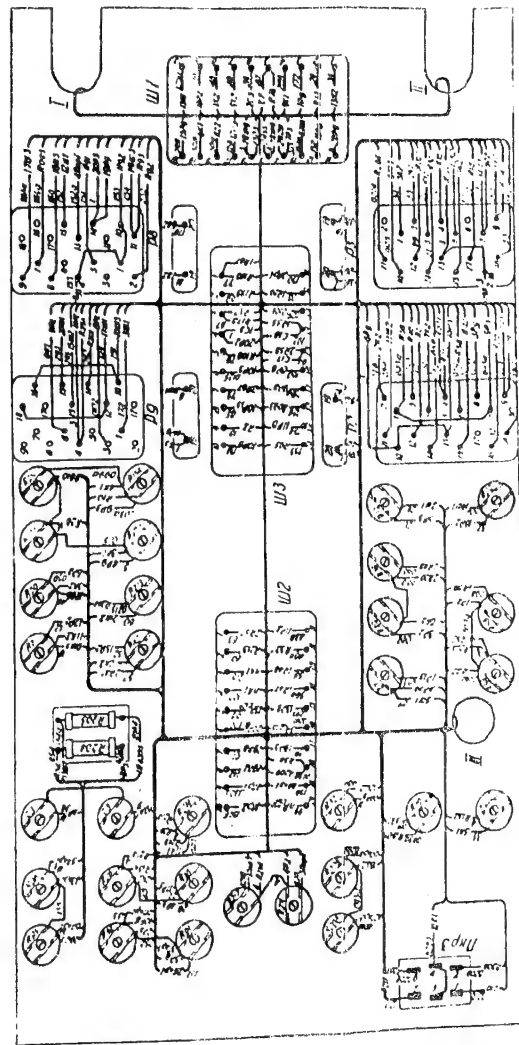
WIRING, BOTTOM VIEW
